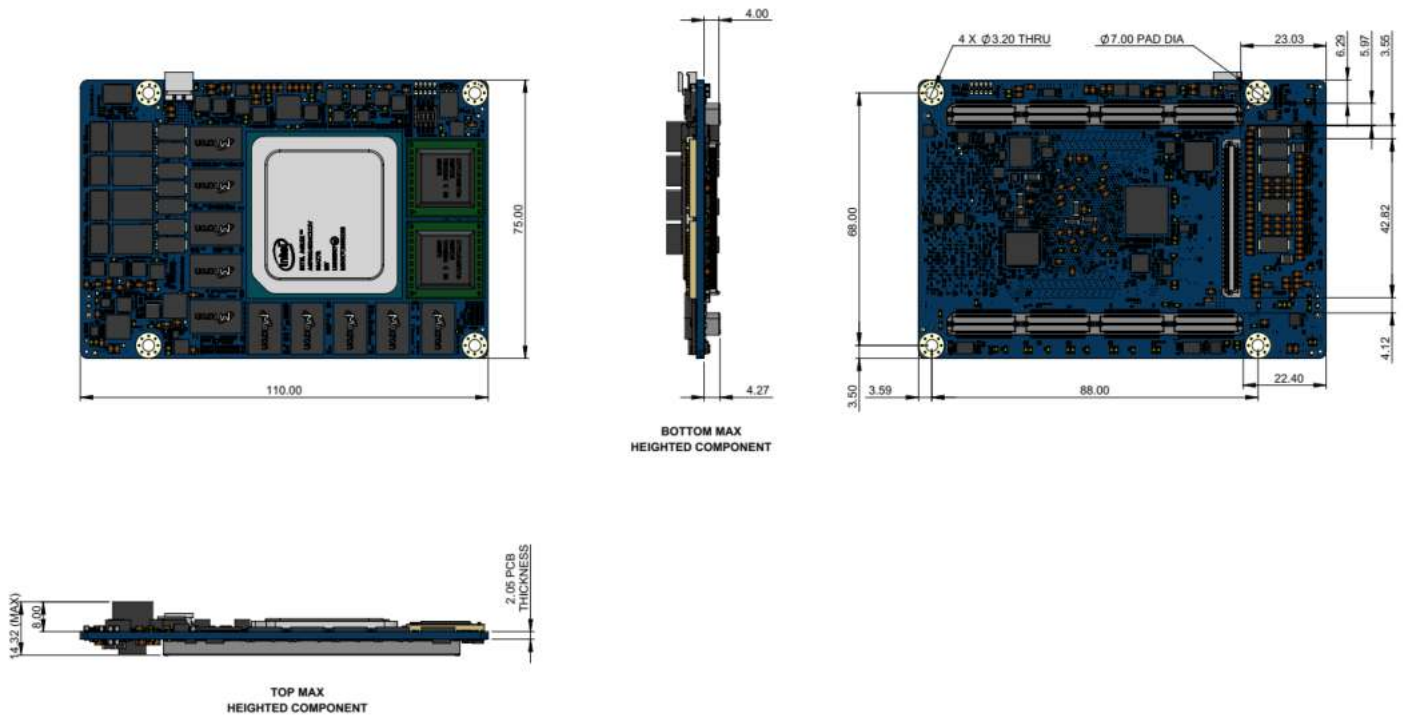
Mechanical dimension of Altera Agilex 7 SoC and FPGA SOM
